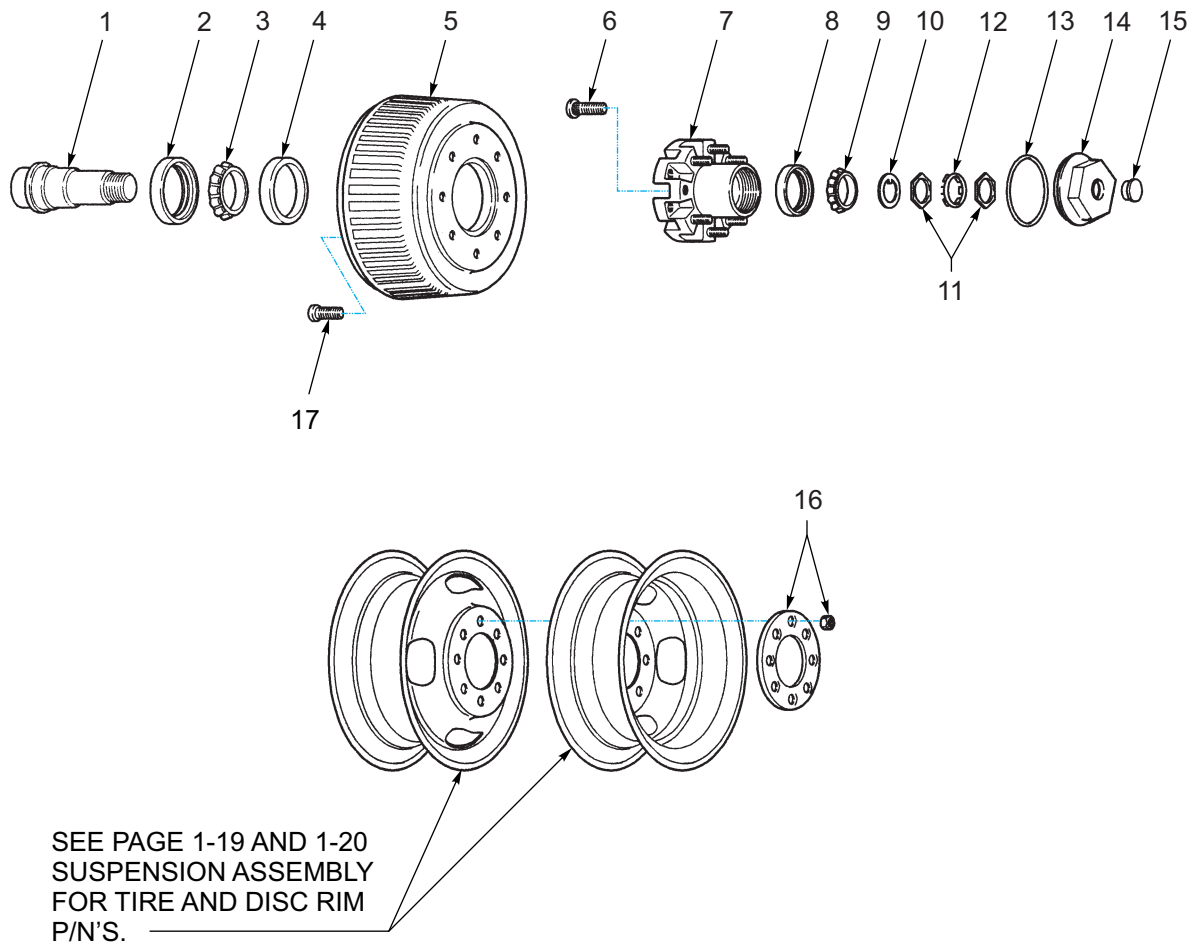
Hub & Drum Assembly - 10K HD & 12K
